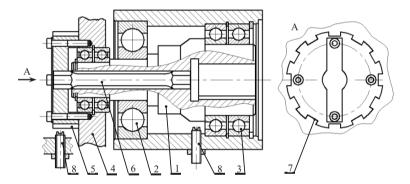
Constructional scheme of torque meter [12]: 1 – driving shaft, 2,3 – radial contact ball bearing, 4 – chain wheel, 5 – measuring disc, 6 – torsional shaft, 7 – inductive sensor, 8 – rows.
